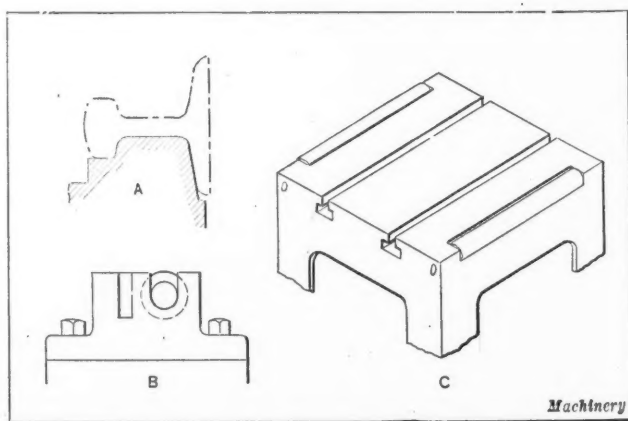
(A) Holding Surface having a Contour Similar to the Profile of the Part it supports; (B) Roller Support for Drilling Machine; (C) Roll Table
